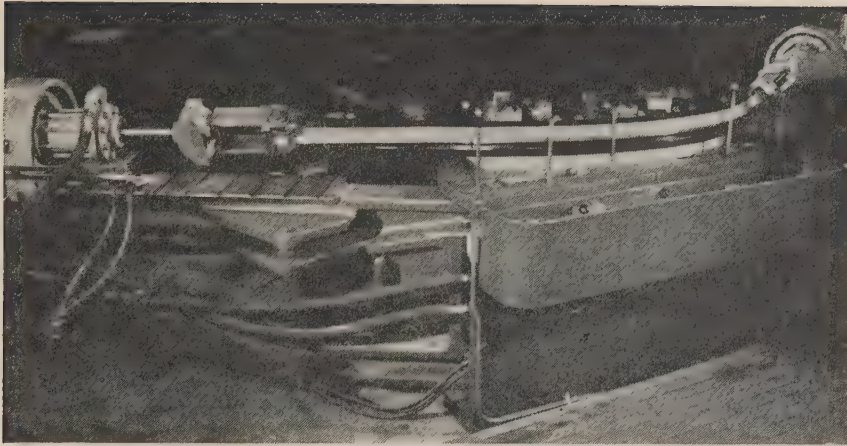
TYPICAL CONTOUR-FORMING MACHINE IN WHICH TENSION IS COMBINED WITH BENDING
